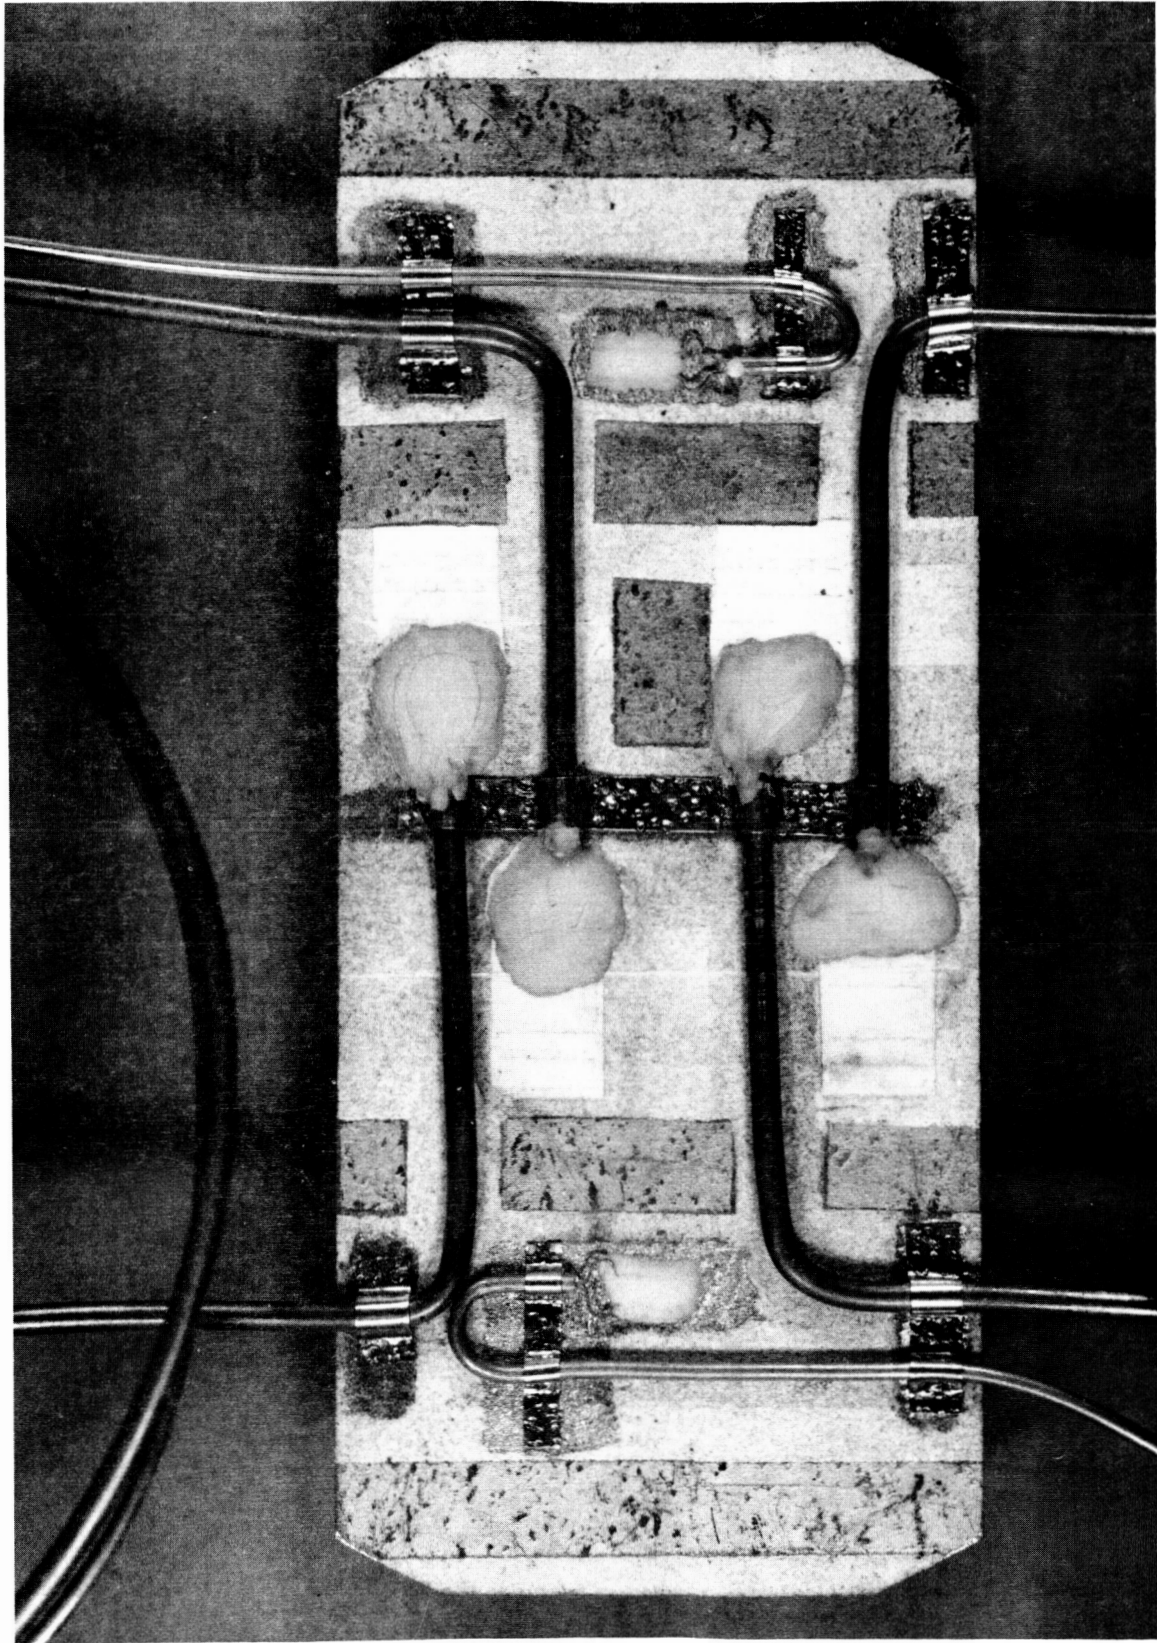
Strain Gage Test Specimen — For Four-Point Bend Testing
